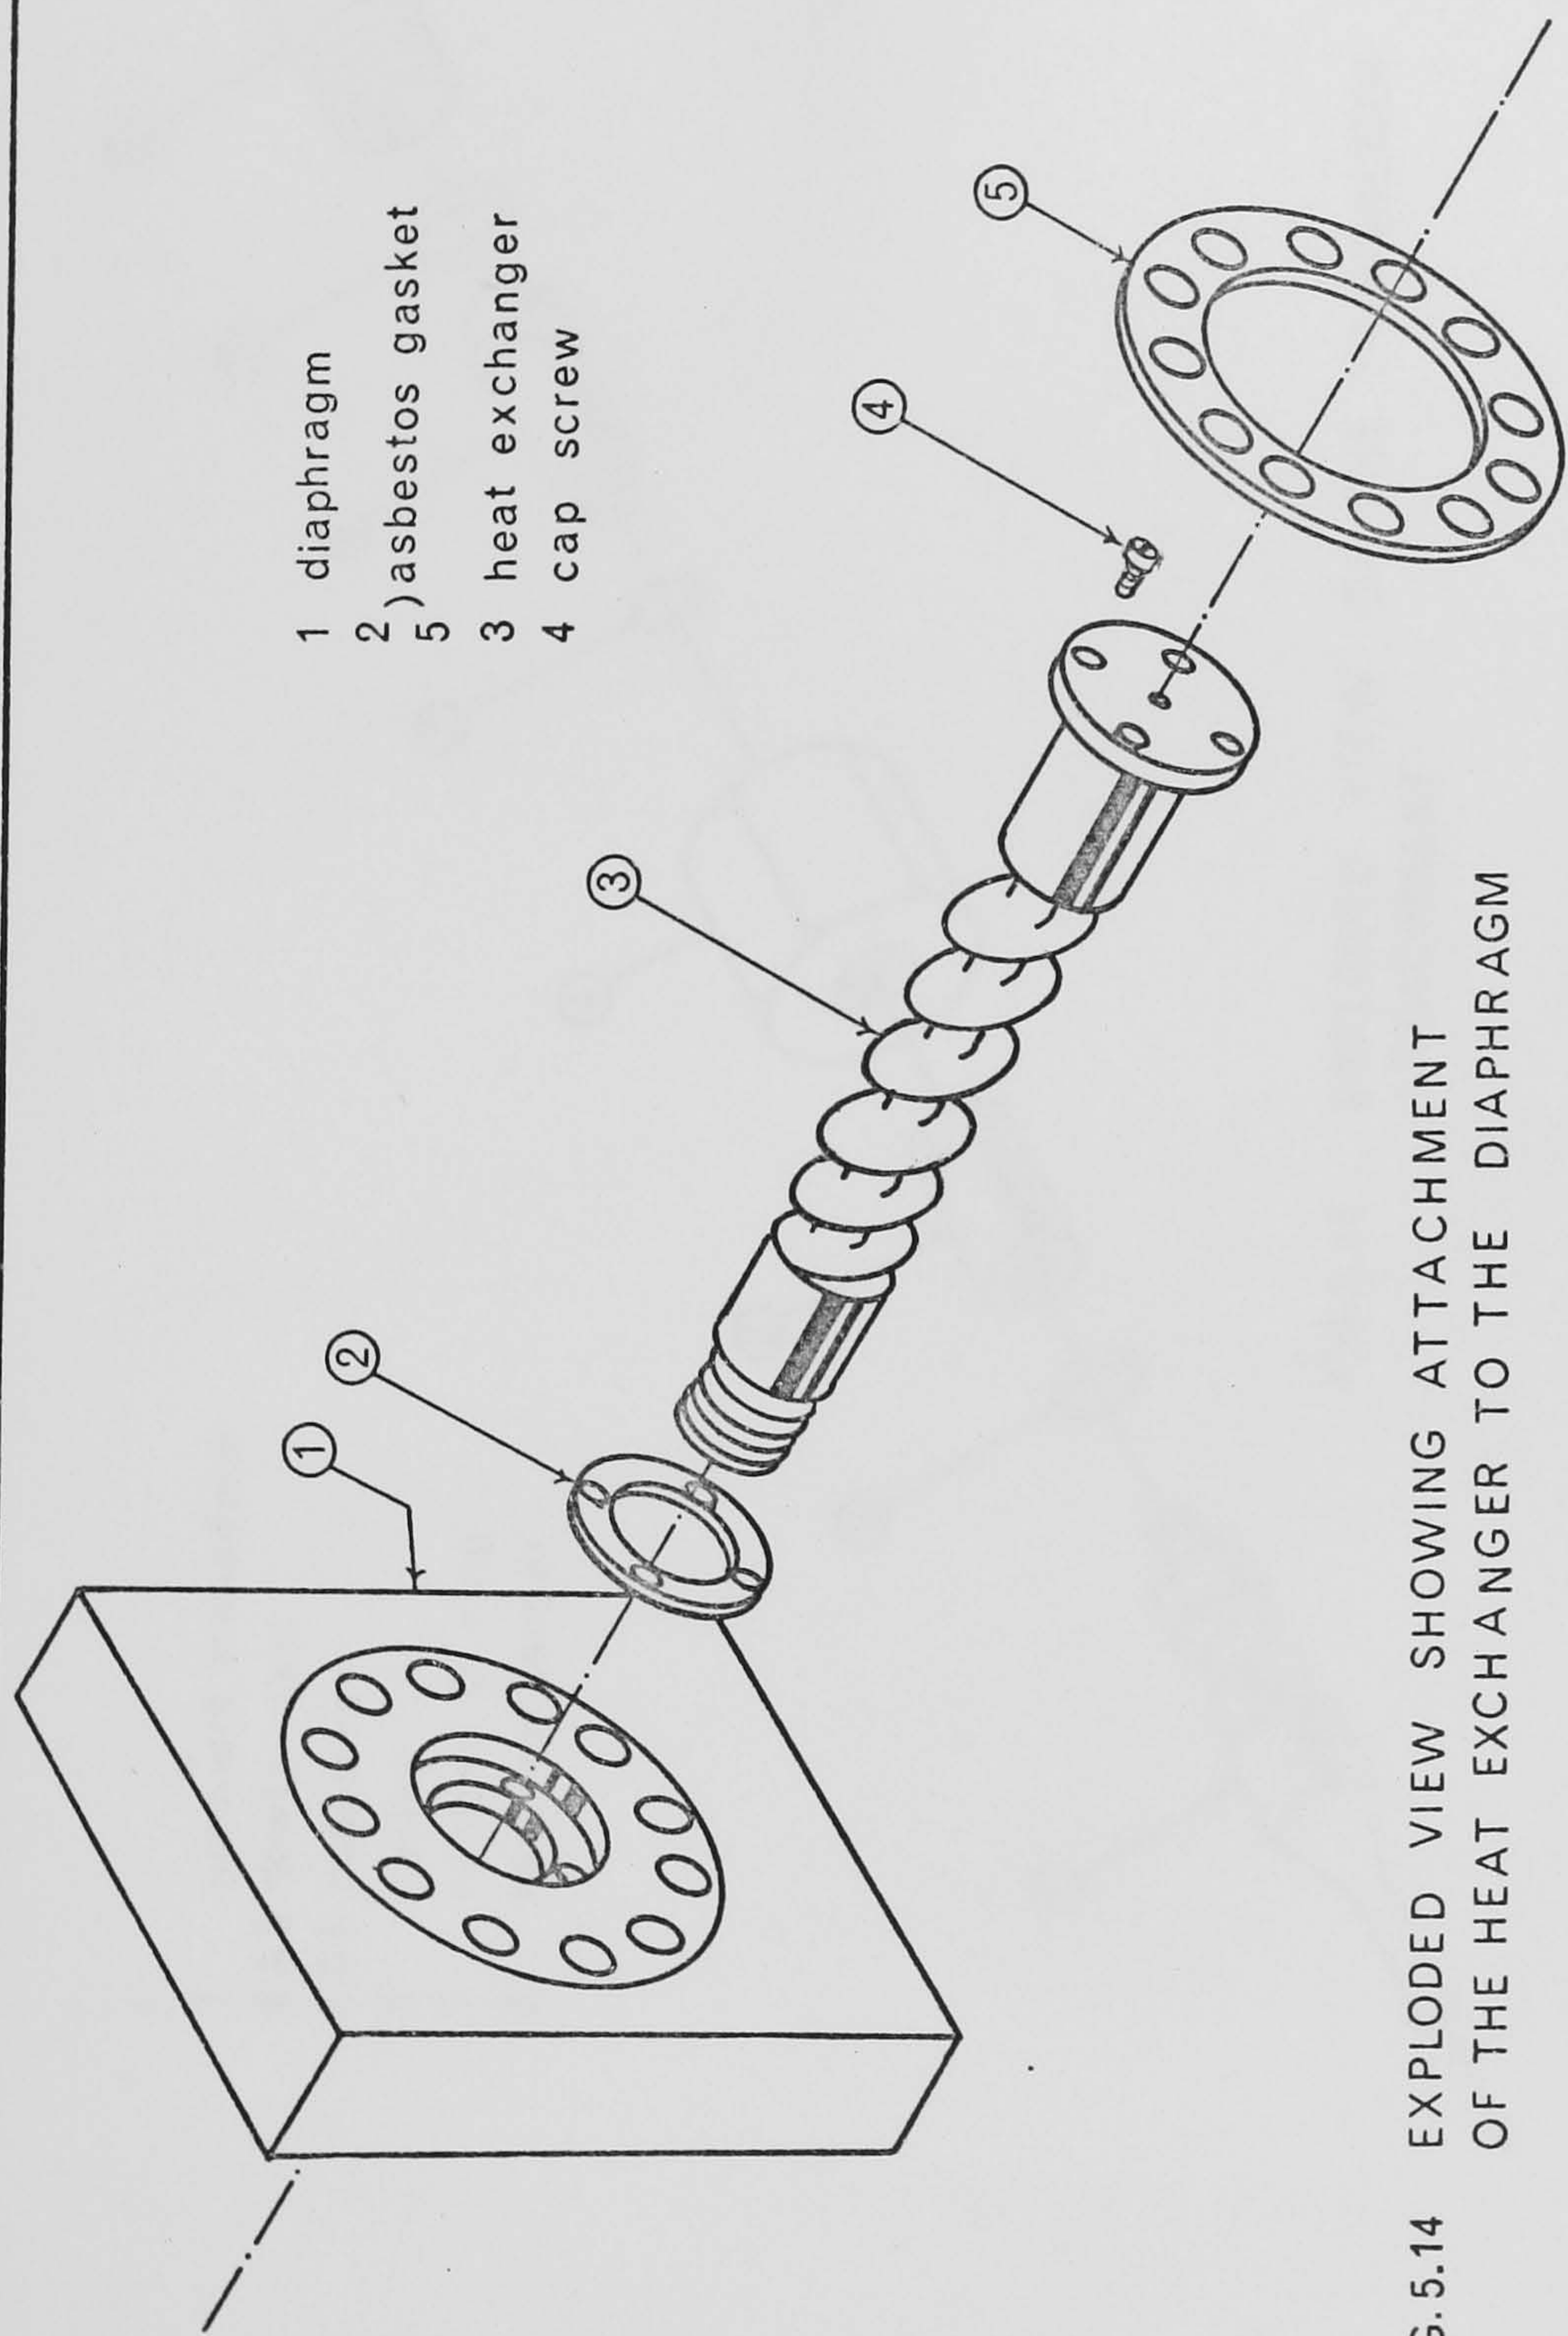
EXPLODED VIEW SHOWING ATTACHMENT
